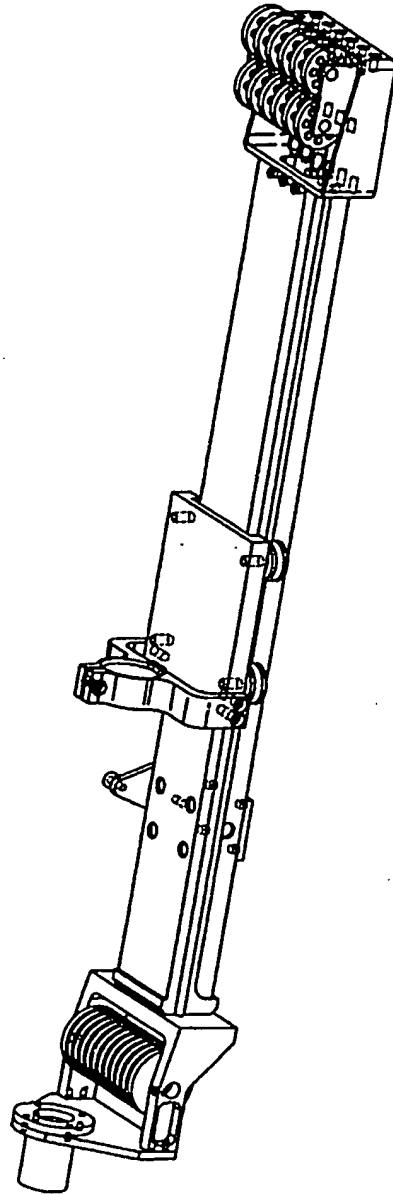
The wrist unit is supported on a carriage. This carriage is mounted on INA roller bearings which run on 4 mm steel shafts mounted into grooves machined the carriage beam, which is constructed of machined aluminum box tubing and welded to the lower fork.
